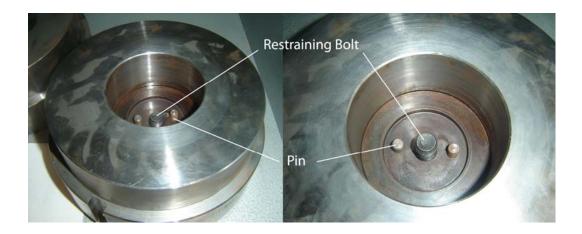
Locations of the Clamping Parts of Upper Coining Die Set
